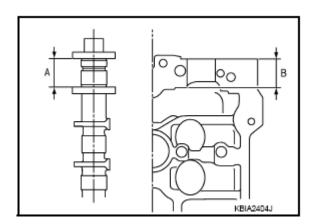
Identifying Camshaft (INT) Journal And Cylinder Head Bearing Dimension Courtesy of NISSAN NORTH AMERICA, INC.
